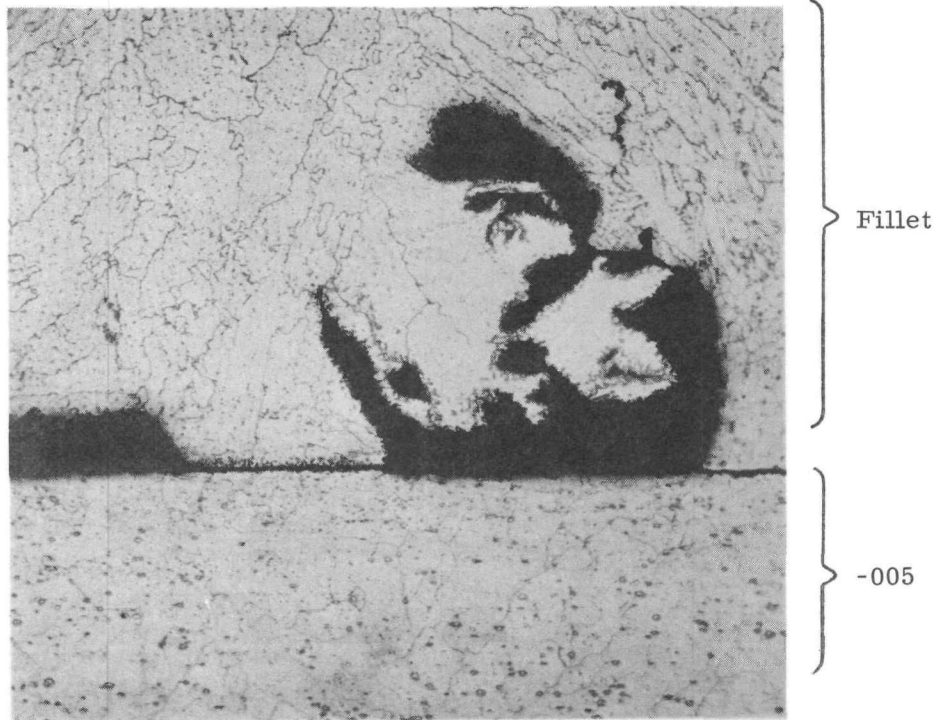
TIG WELD DEFECT IN SPECIMEN 1; MAGN 64X
